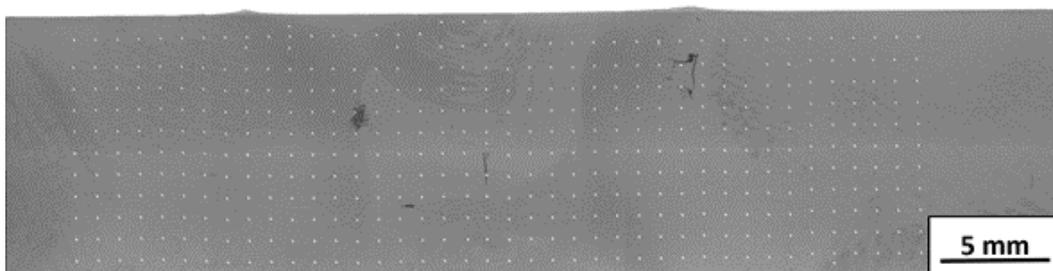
The view of FSW welded specimen after hardness testing with visible measurement points
